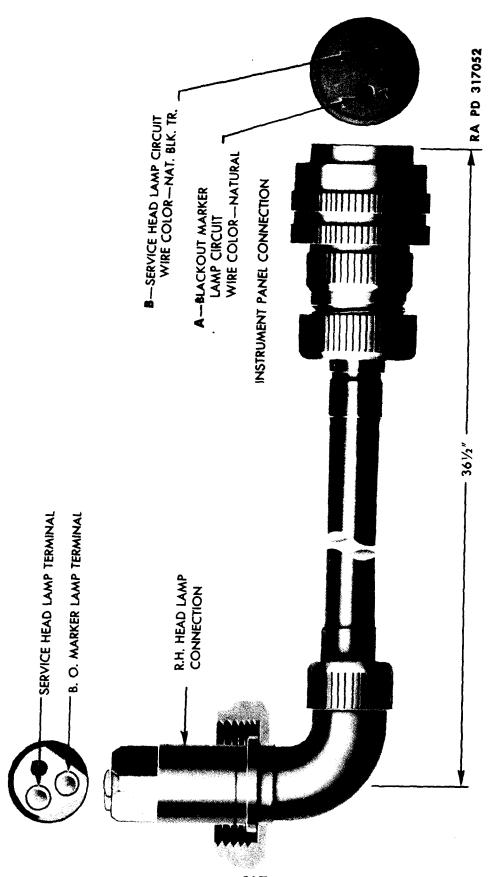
Instrument Panel to Right Hand Headlamp Wiring Harness
